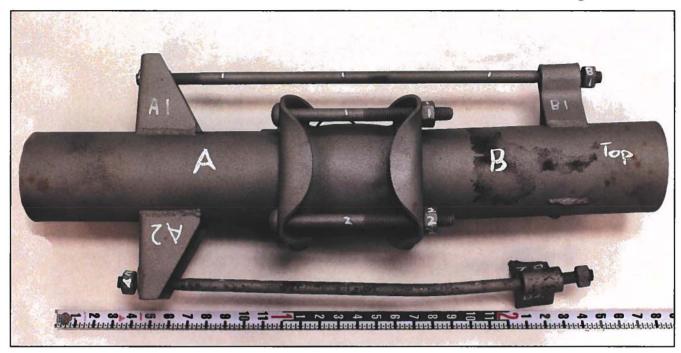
Photograph of the top of the submitted coupling. Lug and rod identifications are shown.
